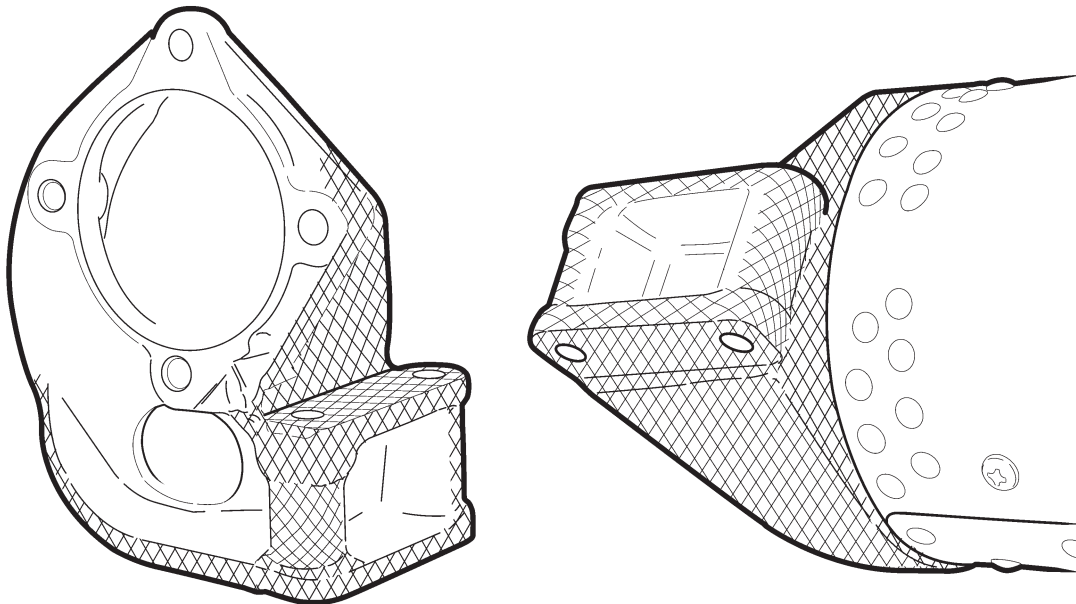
PENETRANT INSPECT CROSS-HATCHED SURFACES OF A148 BULKHEAD
